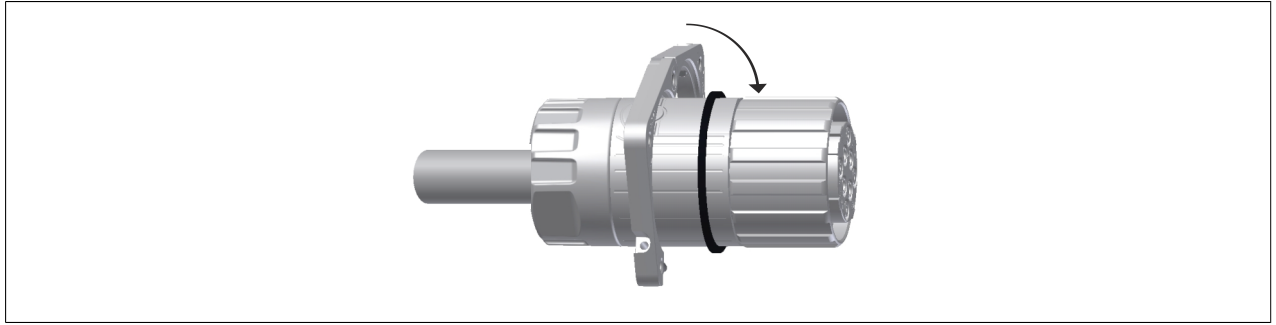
Attaching the metal flange to the connector (rear panel installation)
